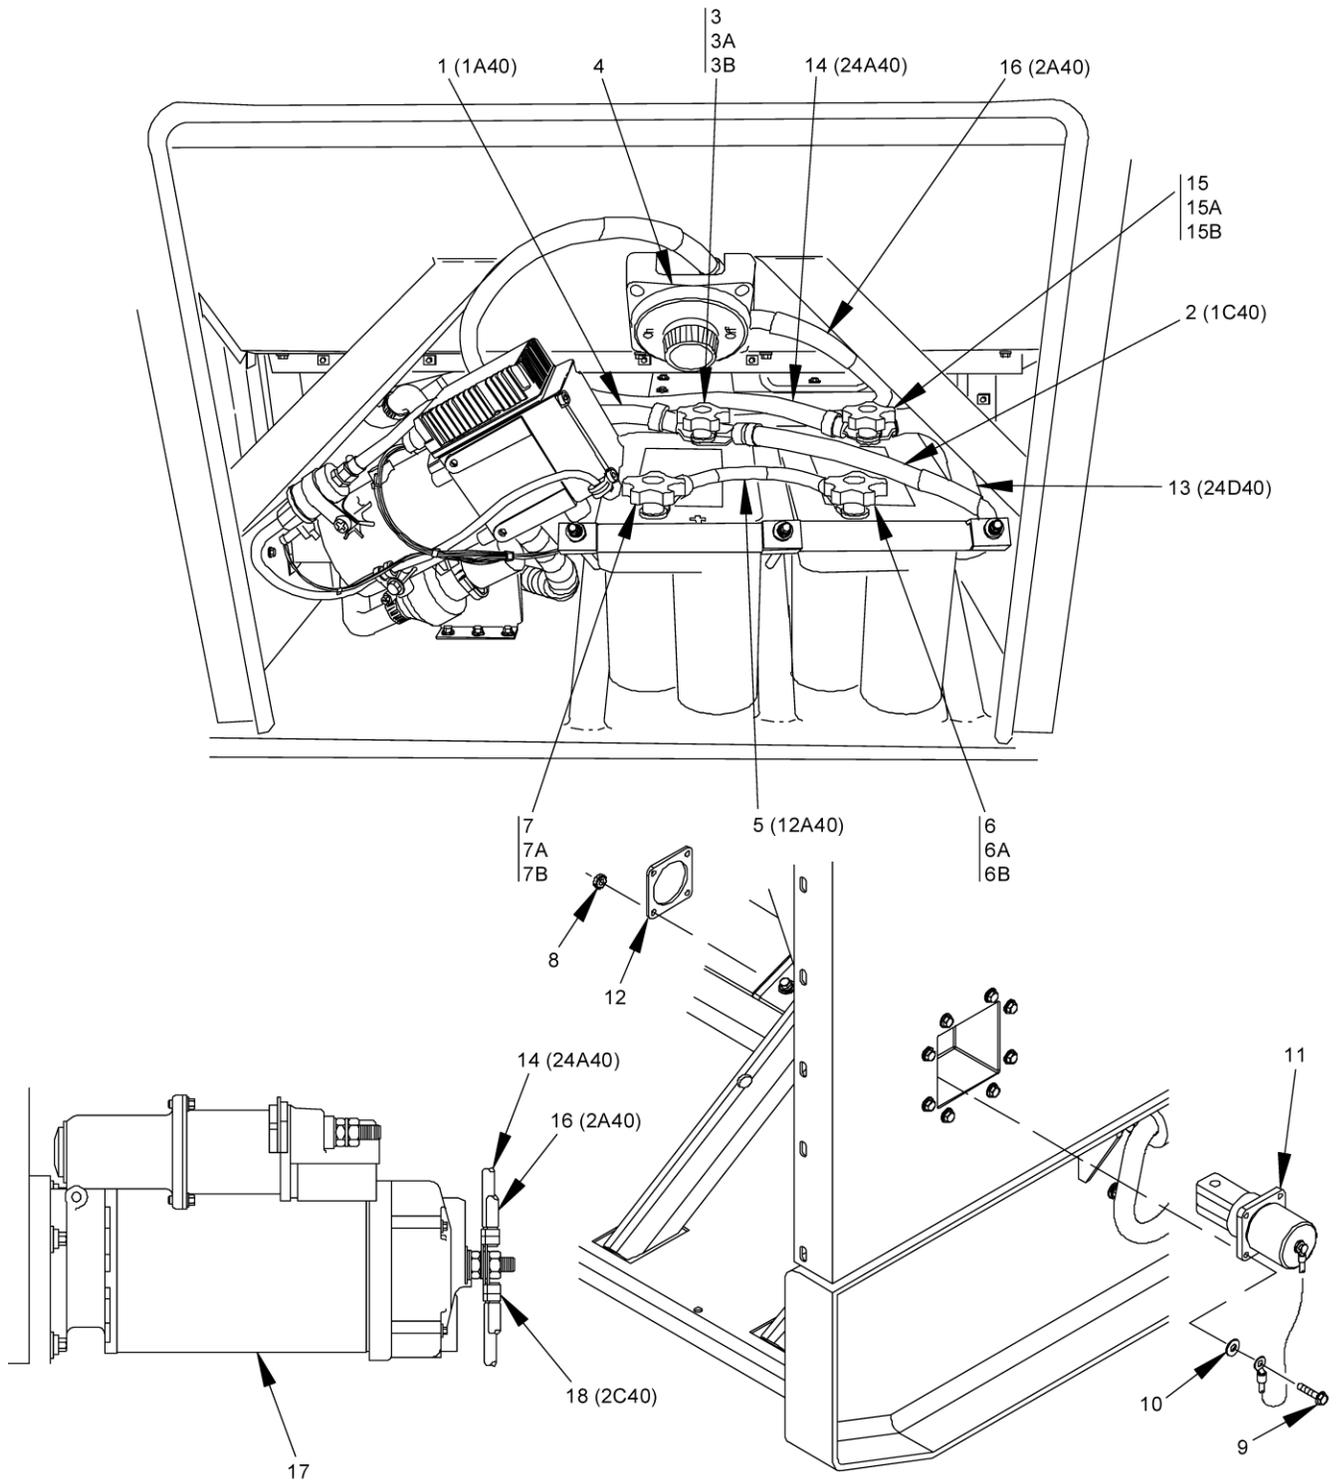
Battery Cable Assemblies (Sheet 1 of 2).
